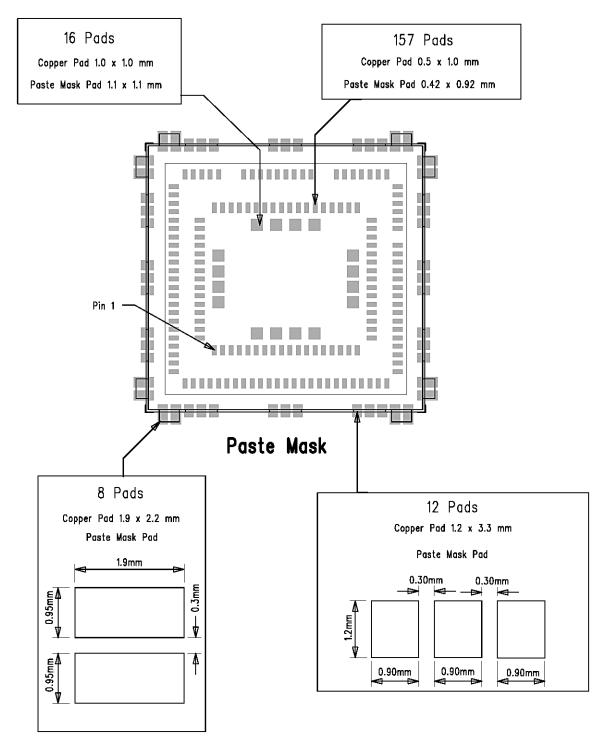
Recommended WP and RC76 Series Snap-in Socket Footprint – Paste Mask Layout
